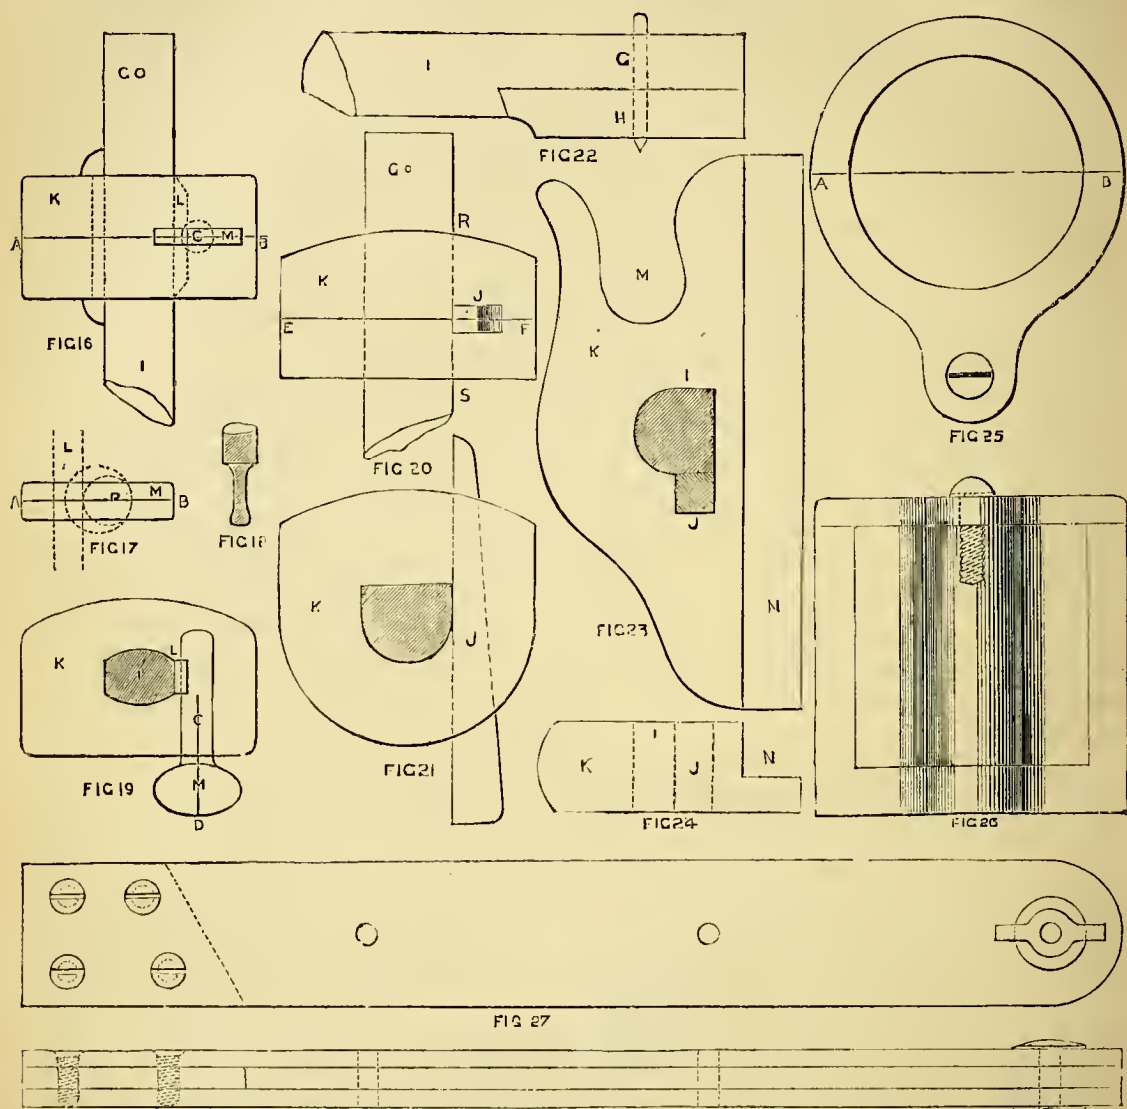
ECCENTRIC GAUGE, ELEVATION. FIG. 17.—PART ABOUT C, FIG. 16 (FULL SIZE). FIG. 18.—SECTION THROUGH C D IN FIG. 19. FIG. 19.—SECTION THROUGH A B IN FIG. 16. FIG. 20.—WEDGE GAUGE, ELEVATION. FIG. 21.—SECTION THROUGH E F, FIG. 20. FIG. 22.—PANEL GAUGE, SIDE ELEVATION OF TOP END OF ROD. FIG. 23.—PLAN OF STOCK. FIG. 24.—END ELEVATION OF STOCK. FIG. 25.—LUBRICATOR BOX, PLAN. FIG. 26.—SECTION THROUGH A B, FIG. 25. FIG. 27.—BEVEL, PLAN. FIG. 28.—ELEVATION.
